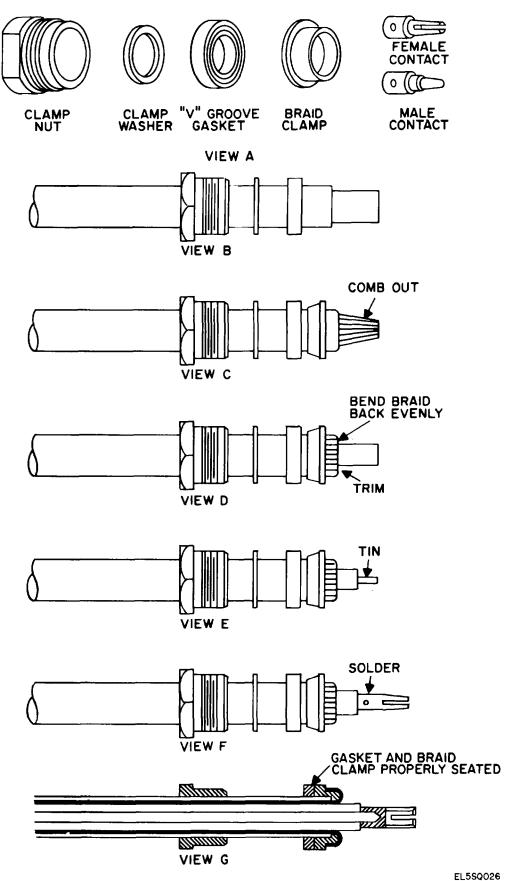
Typical Connector Assembly for Cables IAI W3and W4.
